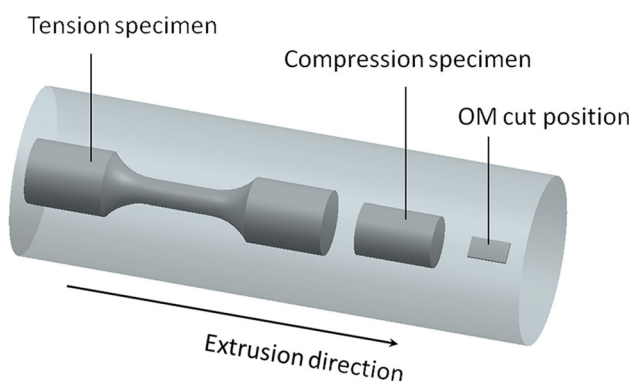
Machining scheme of tension and compression specimens along the extrusion direction
